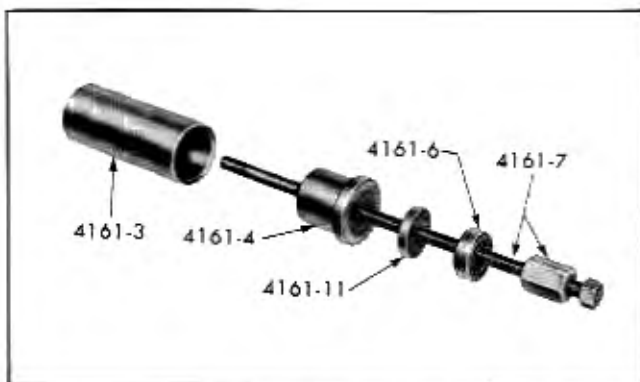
Component Parts of Bushing Replacer Tool J-4161-A
